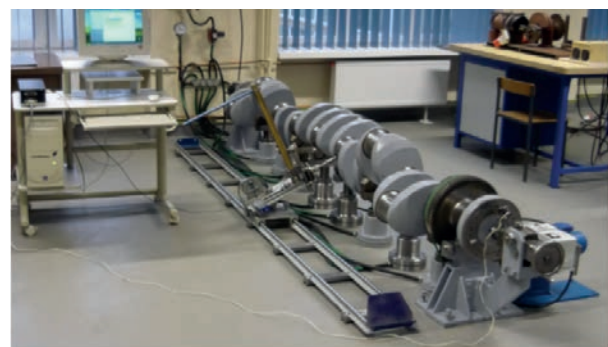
Test stand for the measurement of geometric deviations of crankshafts, equipped with the flexible crankshaft support system
